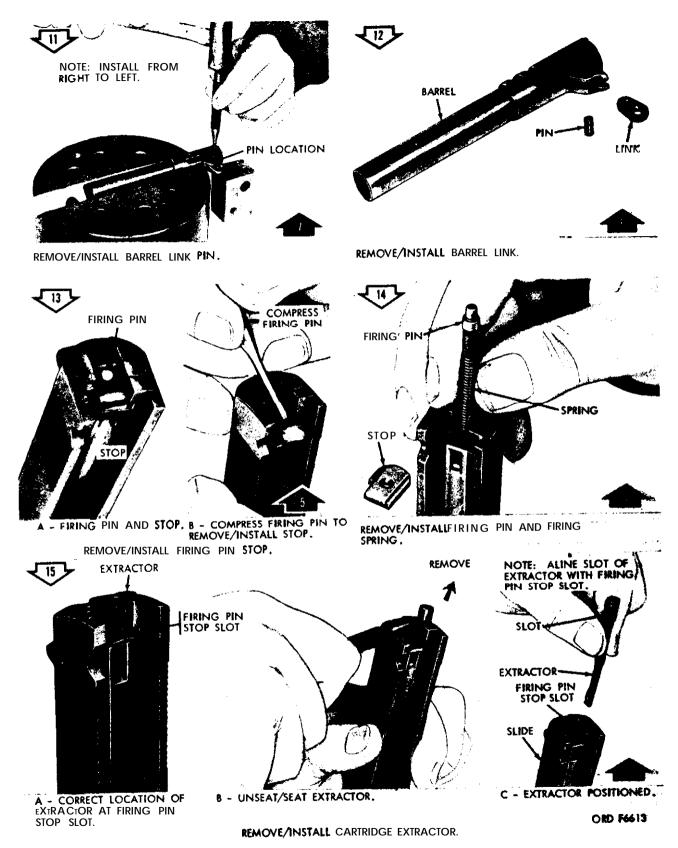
Disassembly/assembly of barrel and slide group (3 of 4).
